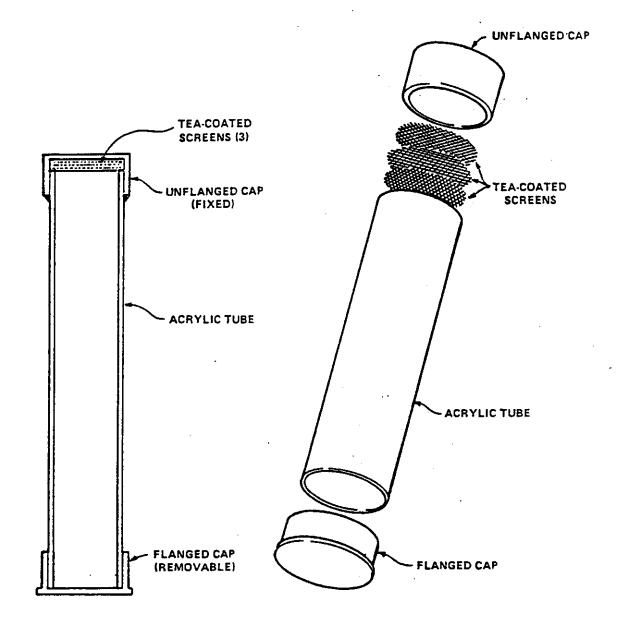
Assembled View (Left) and Exploded View (Right) of Palmes NO₂ Diffusion Tube Sampler
